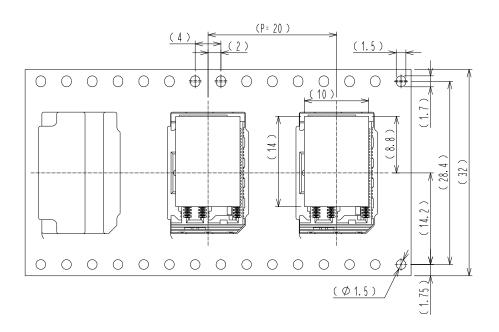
Embossed Carrier Tape for IT9 Receptacle (dimensions in mm)
